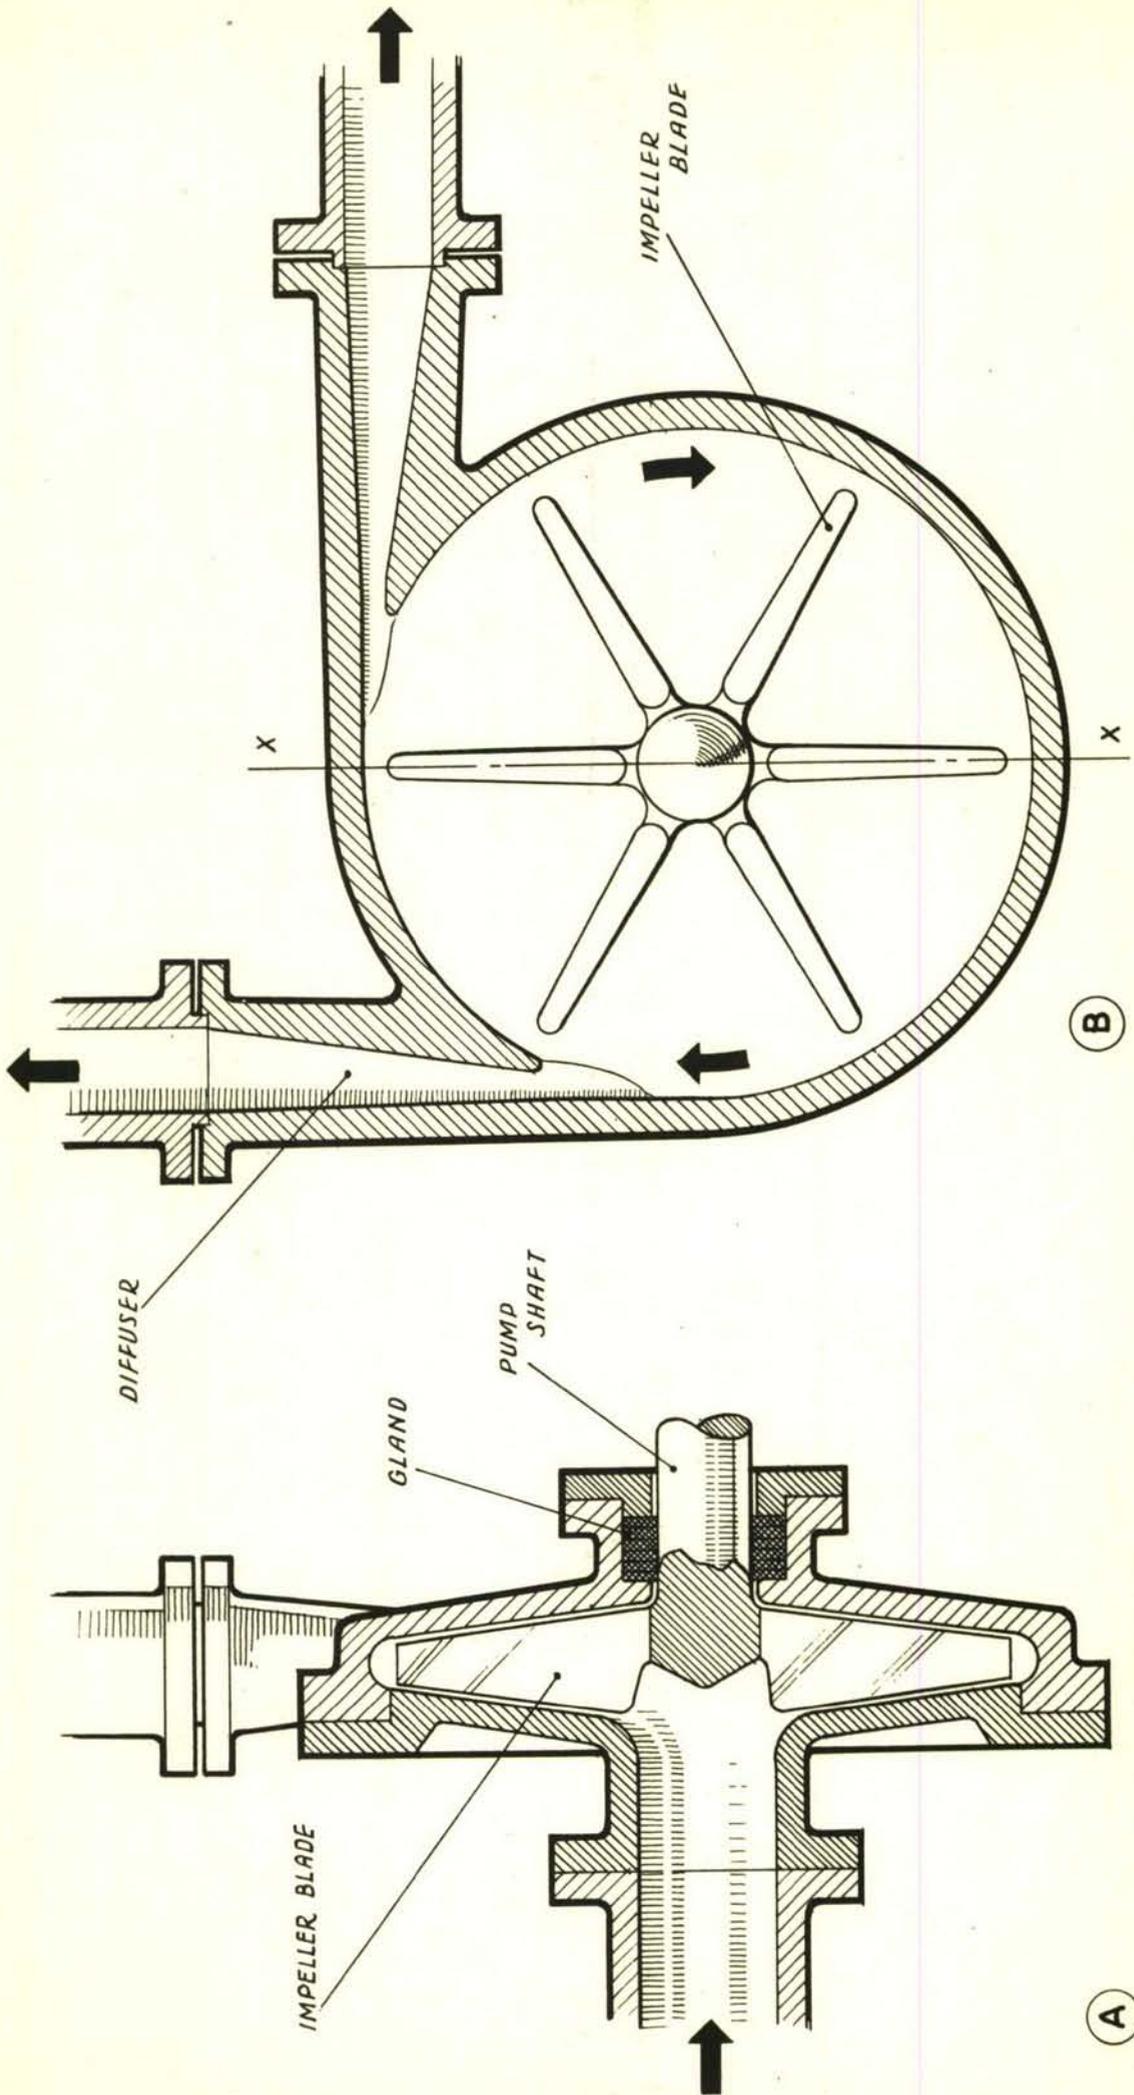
OPEN IMPELLER PUMP (INITIAL DESIGN)
